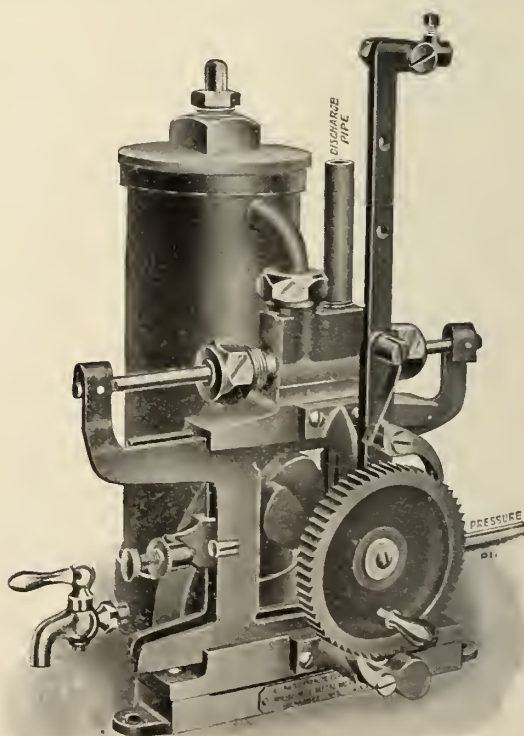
ASSEMBLAGE VIEW OF PUMP.
